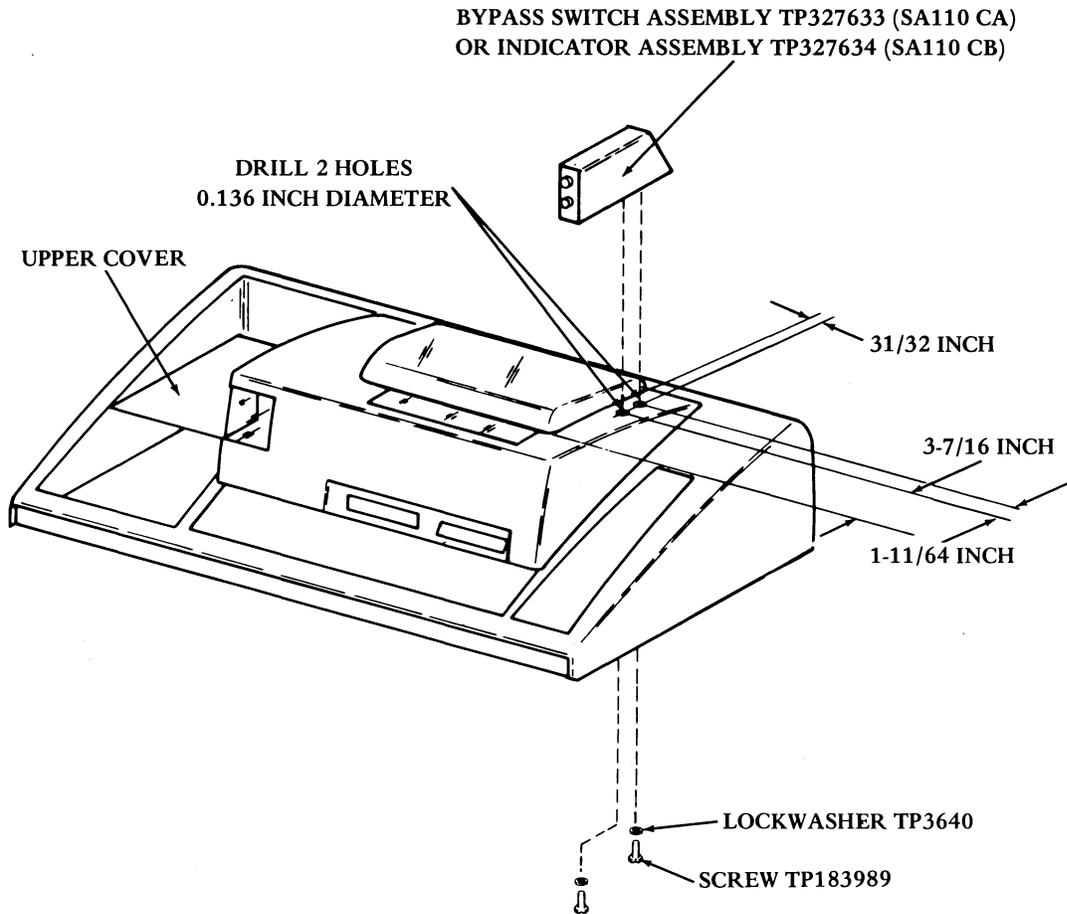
Mounting of Bypass Switch or Indicator Assembly on 35 Type Sets
